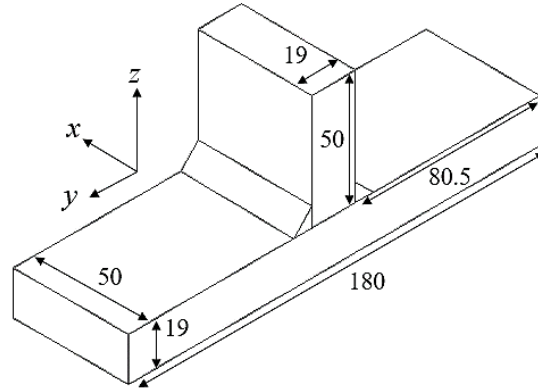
Geometry of the welded joint used in HFMI-treatment simulation. (All dimensions are in millimeters.)
